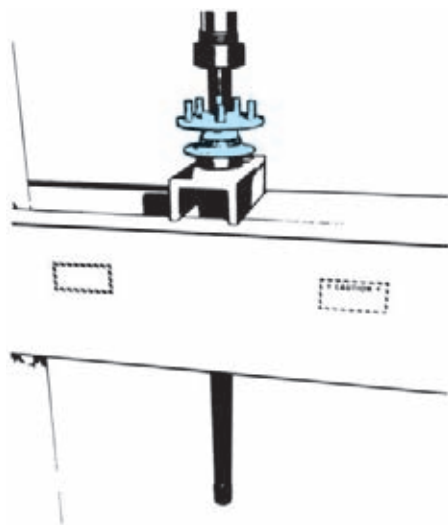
The axle is being pressed into the bearing and retainer plate. (Courtesy of OTC Tools)
